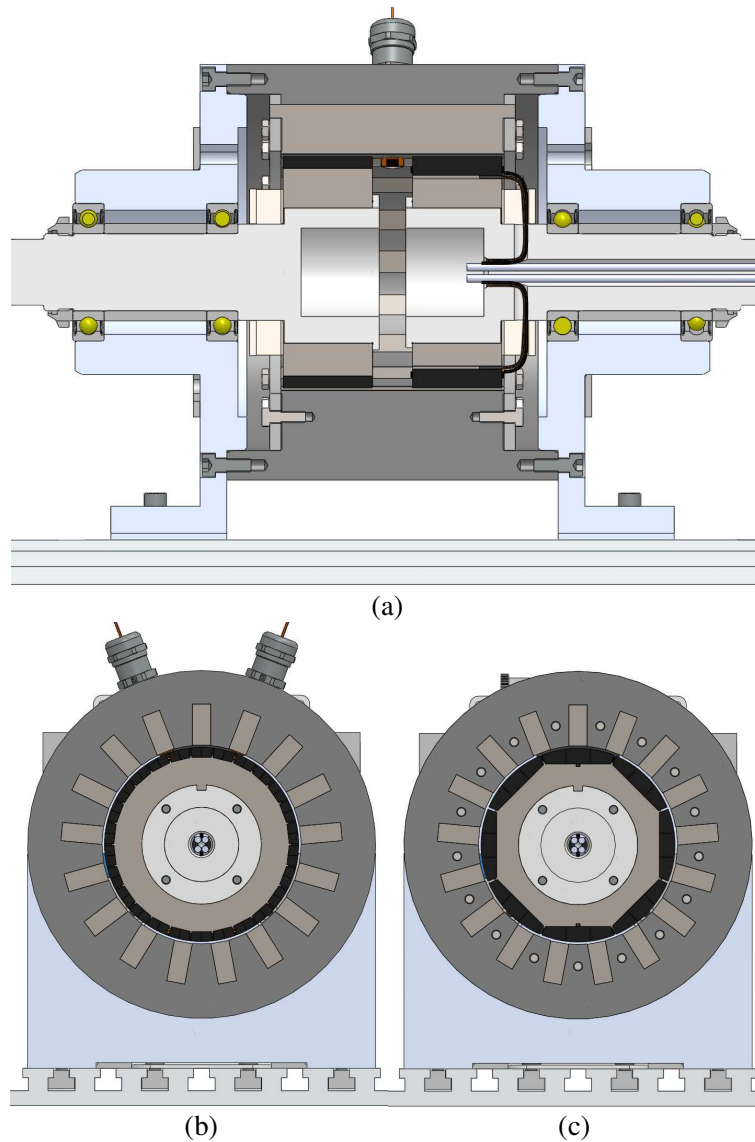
Cross-sectional views of the magnetic gear prototype described in Table I: a) longitudinal view for observing the mechanical design, b) view of the HPN magnetic plane, and c) view of the LPN magnetic plane
